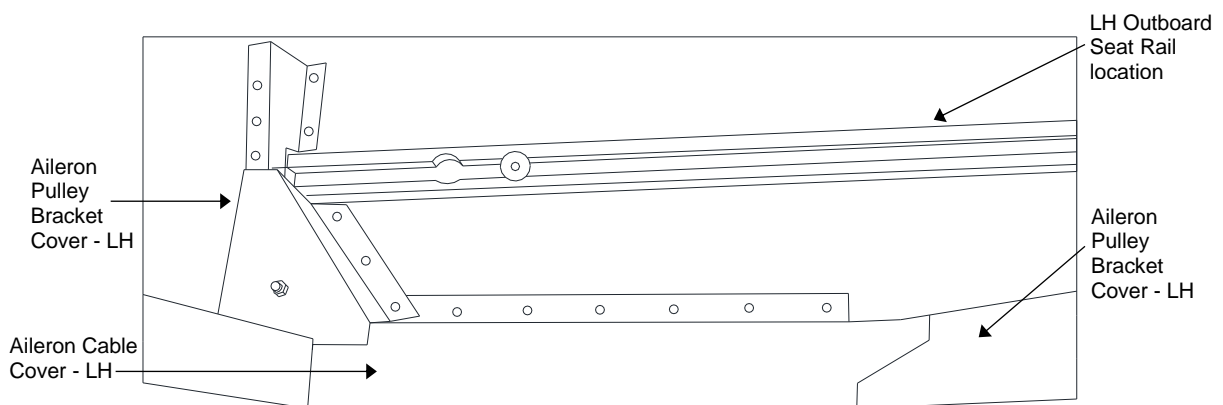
Structure forward of Aileron Pulley bracket cover which may need to be removed.
